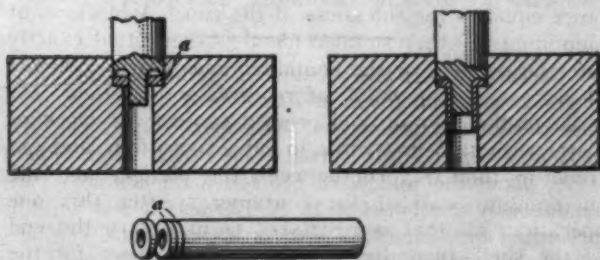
Detail of a Process for Forming Eyelets by Extrusion.
